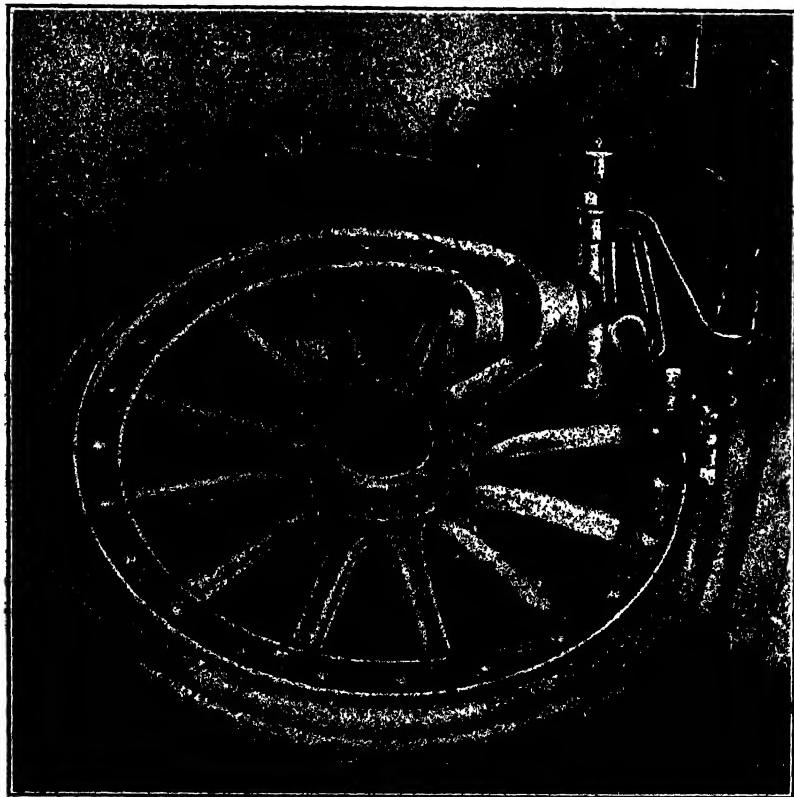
Wheel Removed from Motor Truck Front Axle to Show Arrangement of Bearings on Steering Spindle.
